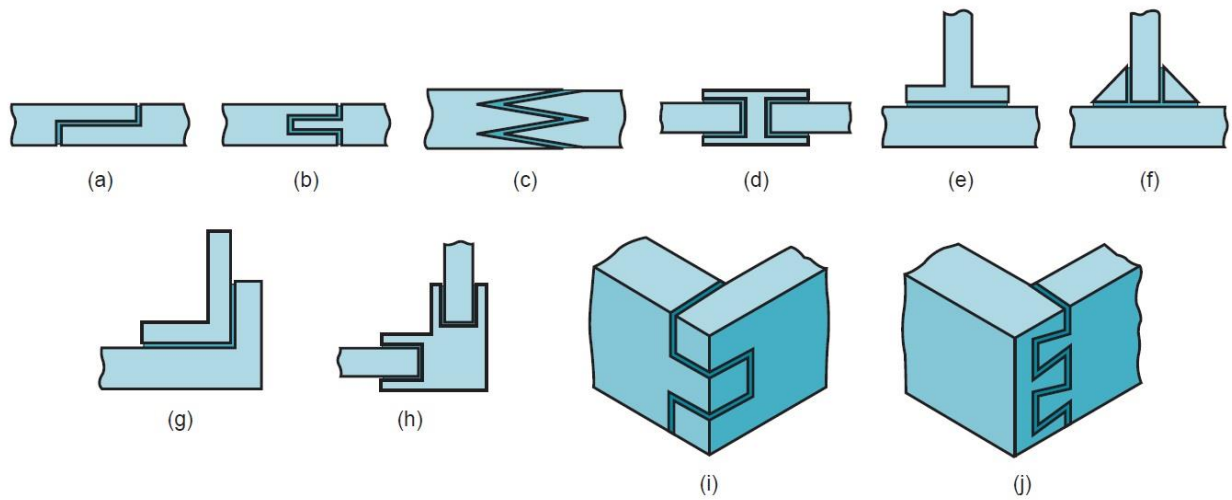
Some joint designs for adhesive bonding: (a) through (d) butt joints; (e) and (f) T-joints; and (g) through (j) corner joints.
